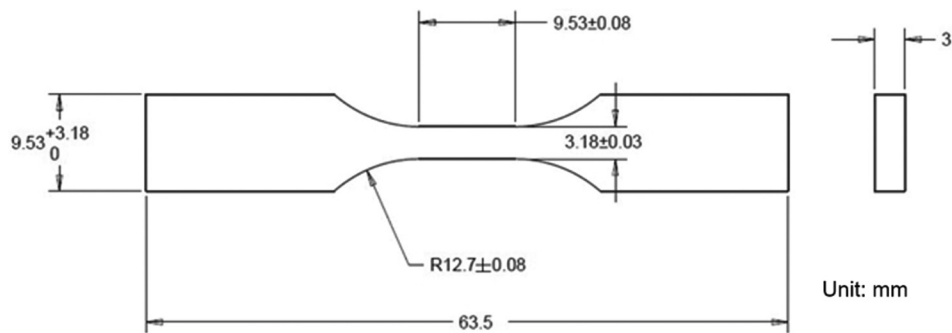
Specimen dimensions for tensile testing based on ASTM D638-14 type V standards
